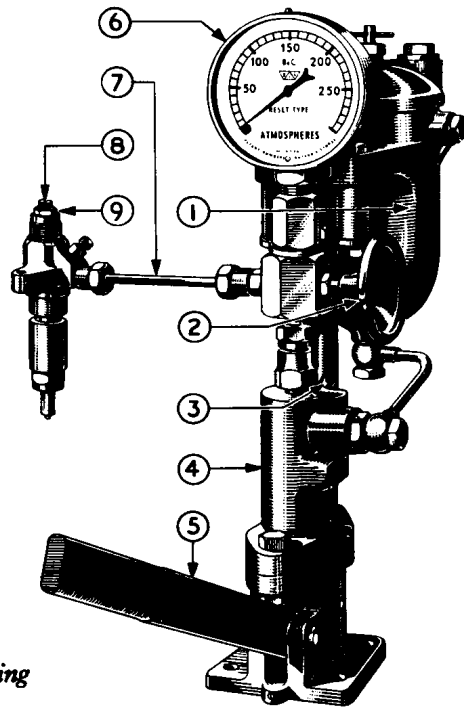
C.A.V. nozzle setting outfit—hand lever type
